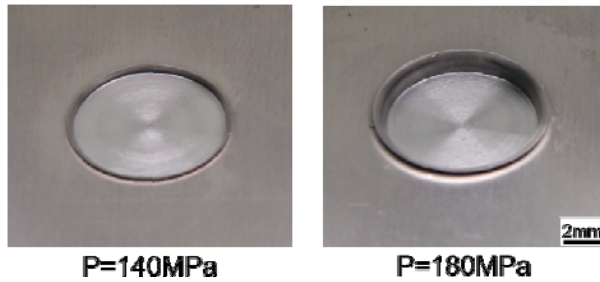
Appearances of friction spot welded joint. (t=1.0s)
